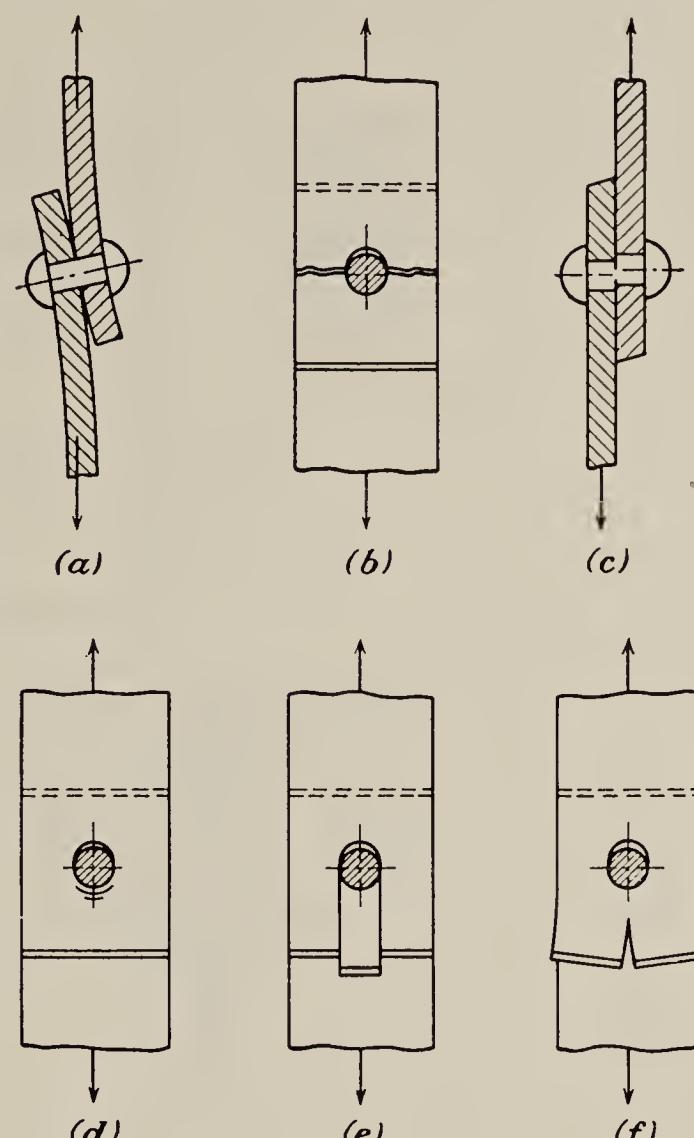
Modes of failure of a riveted joint: (a) bending of the plate; (b) rupturing of the plate by tension; (c) shearing of the rivets; (d) crushing of the rivets or the plates; (e) shearing of the margin; (f) tearing of the margin.
